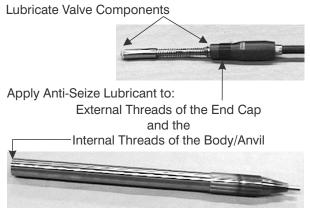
Prepare Tali Assembly and Body Anvil for Assembly
